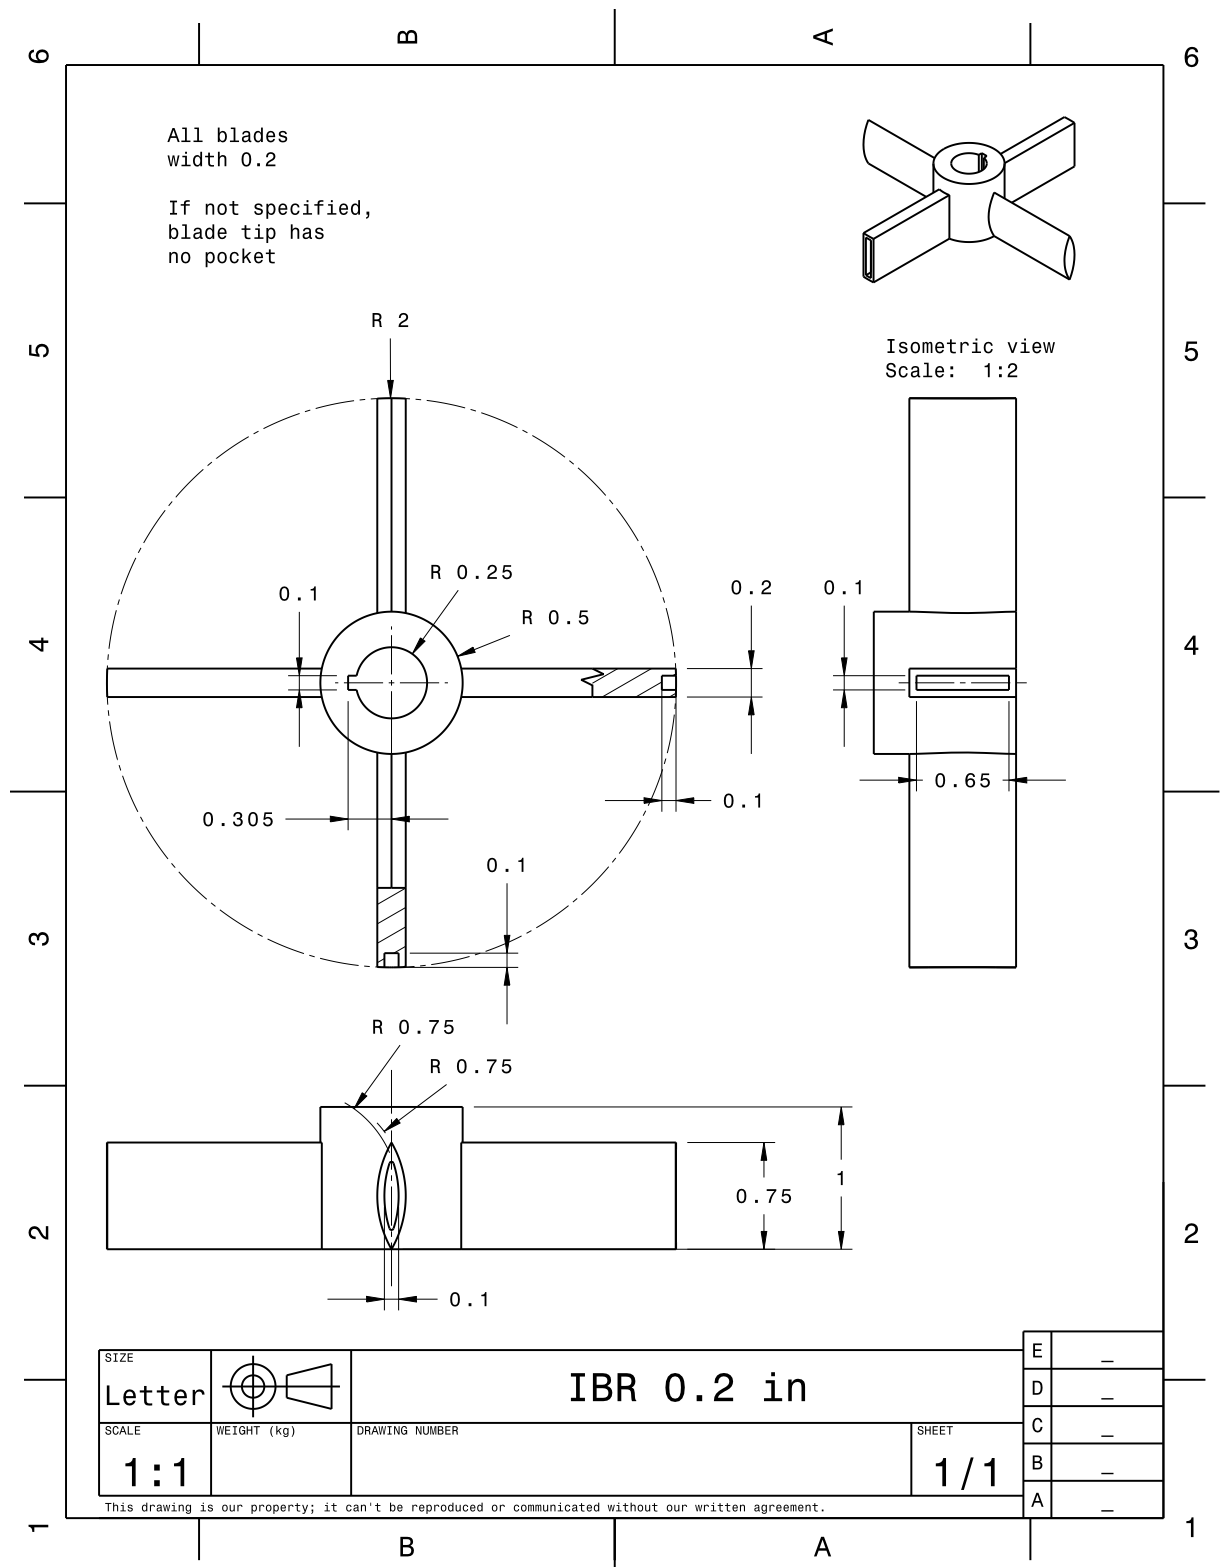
Technical drawing of IBR with blade width 0.2 in
